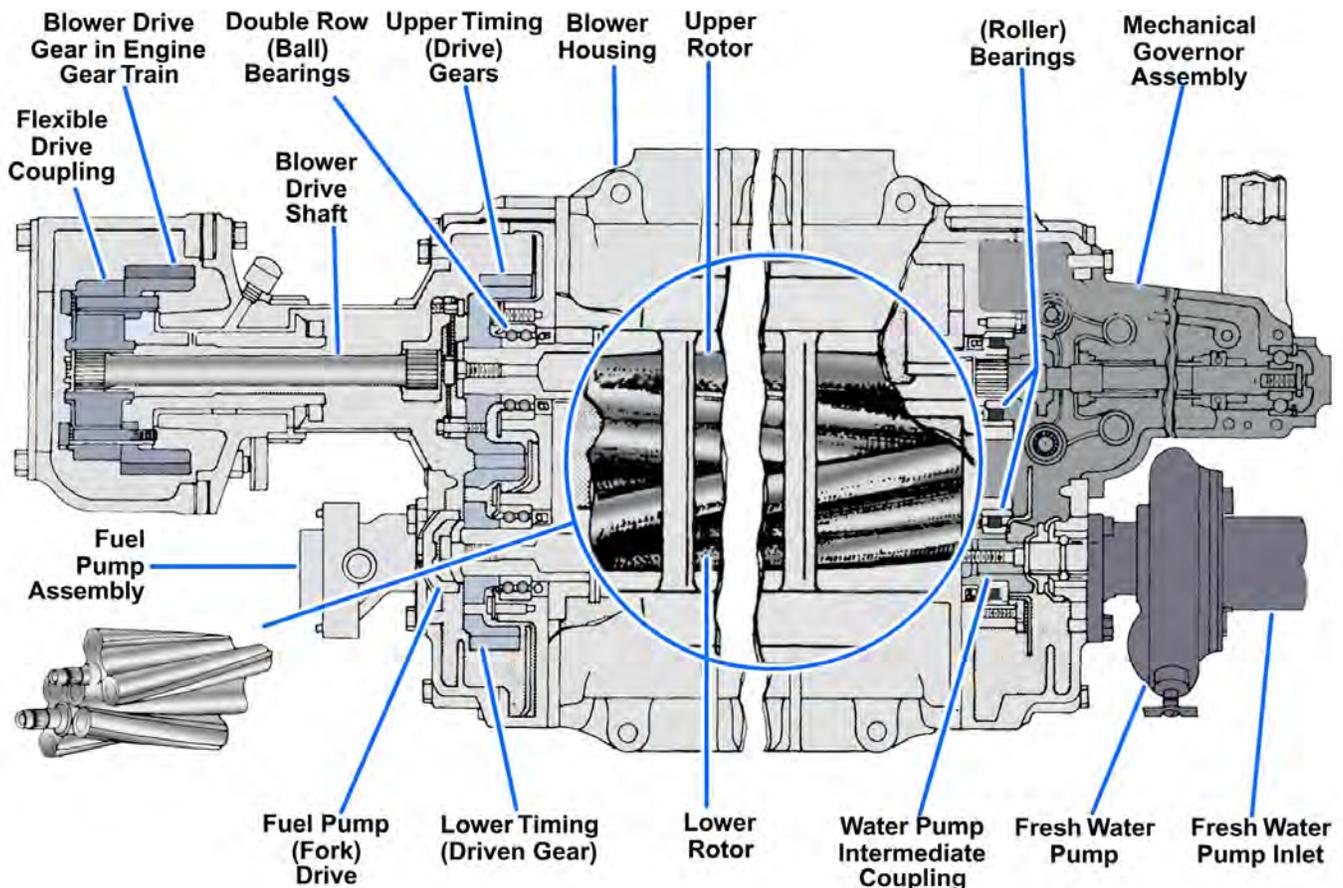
Blower, drive assembly, and accessories. Mechanical governor attached.
